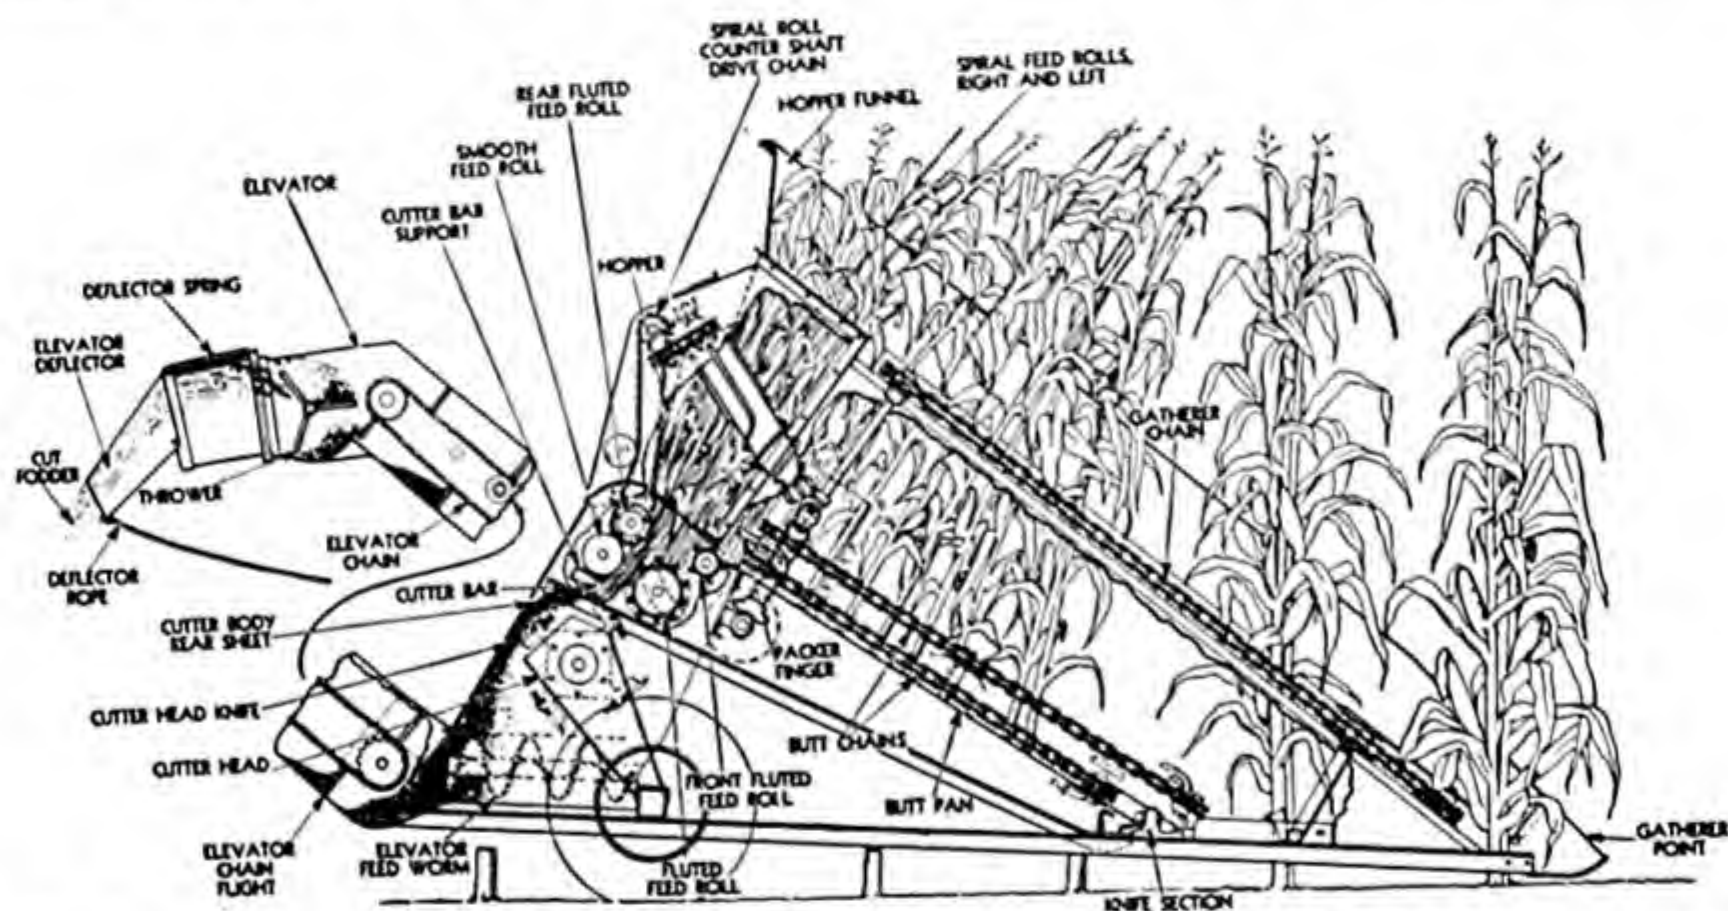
Sectional view of field silage cutter showing details of both the harvester and cutter units.
